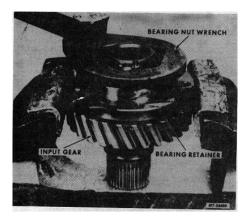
Tightening Input Gear Bearing Retaining Nut (RA 351, 355 Shown RA-341 Similar)
